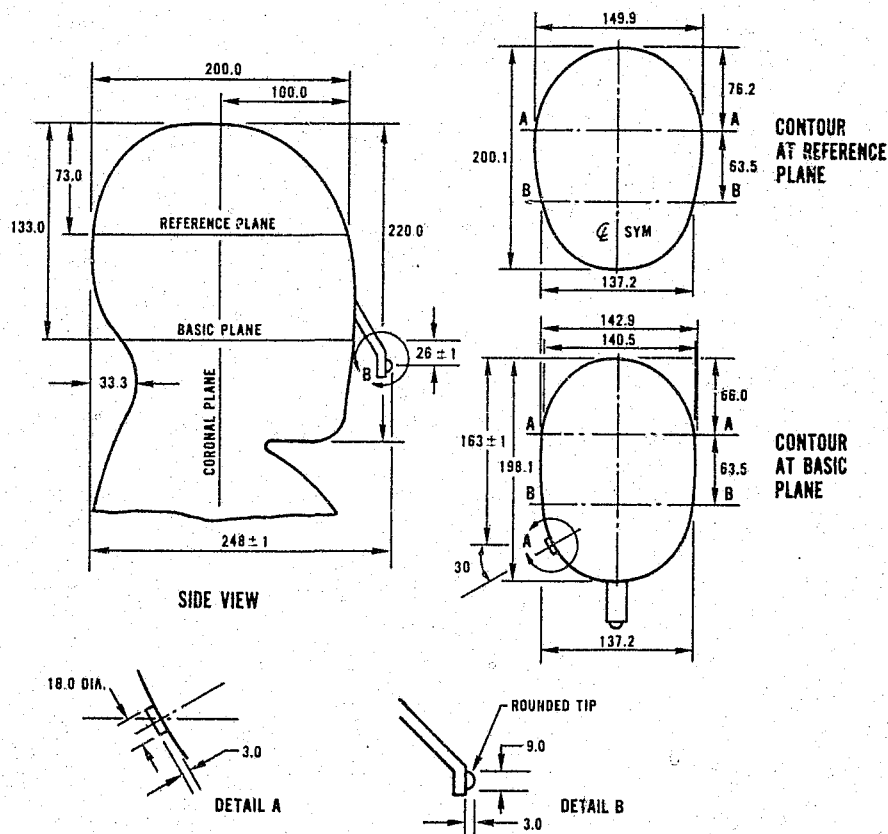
Impact protection and fastening system test headform, dimensions in mm.
